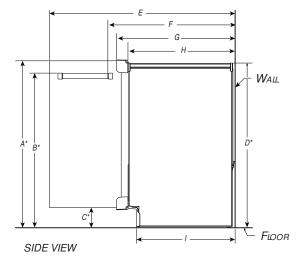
DETAILED PLANNING DIMENSIONS 15" ICE MACHINES
